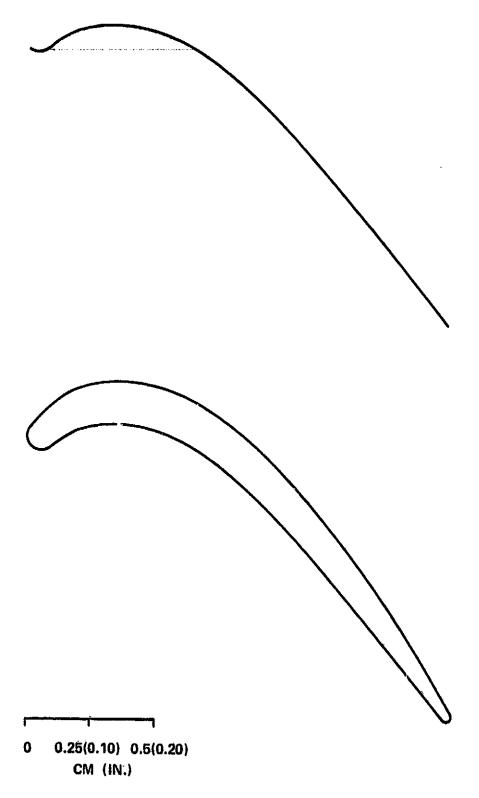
Rotor Tip Section [R = 14.16 cm (5.57 inches)] of the MATE Final Design
